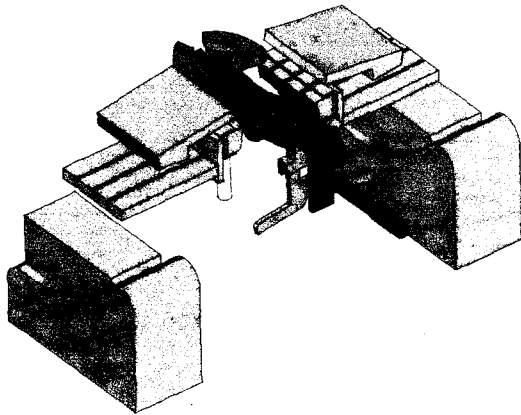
Moved position of the parts of the heel/side lasting machine.
